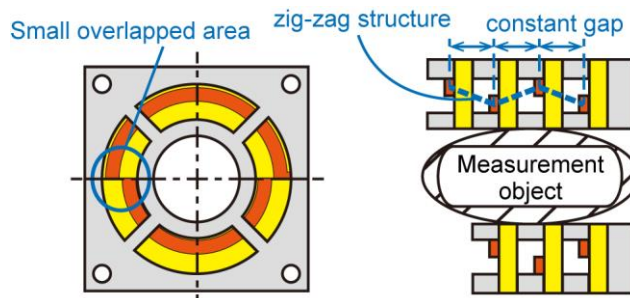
Advantage of the 3D printed jig with hollow skeletal structures.
